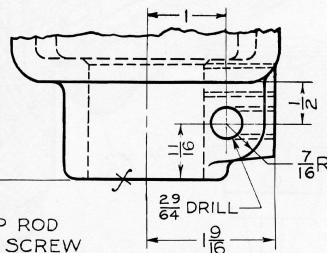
Drill Speeder (Continued). (1) Draw details. (2) Draw assembly.
